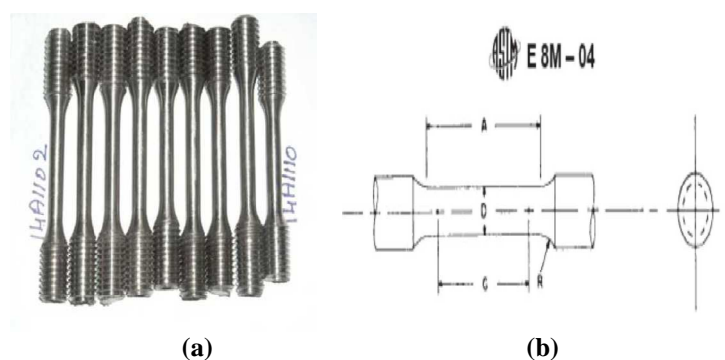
(a) Photograph of Test Specimen (b) ASTM Drawing Specification
